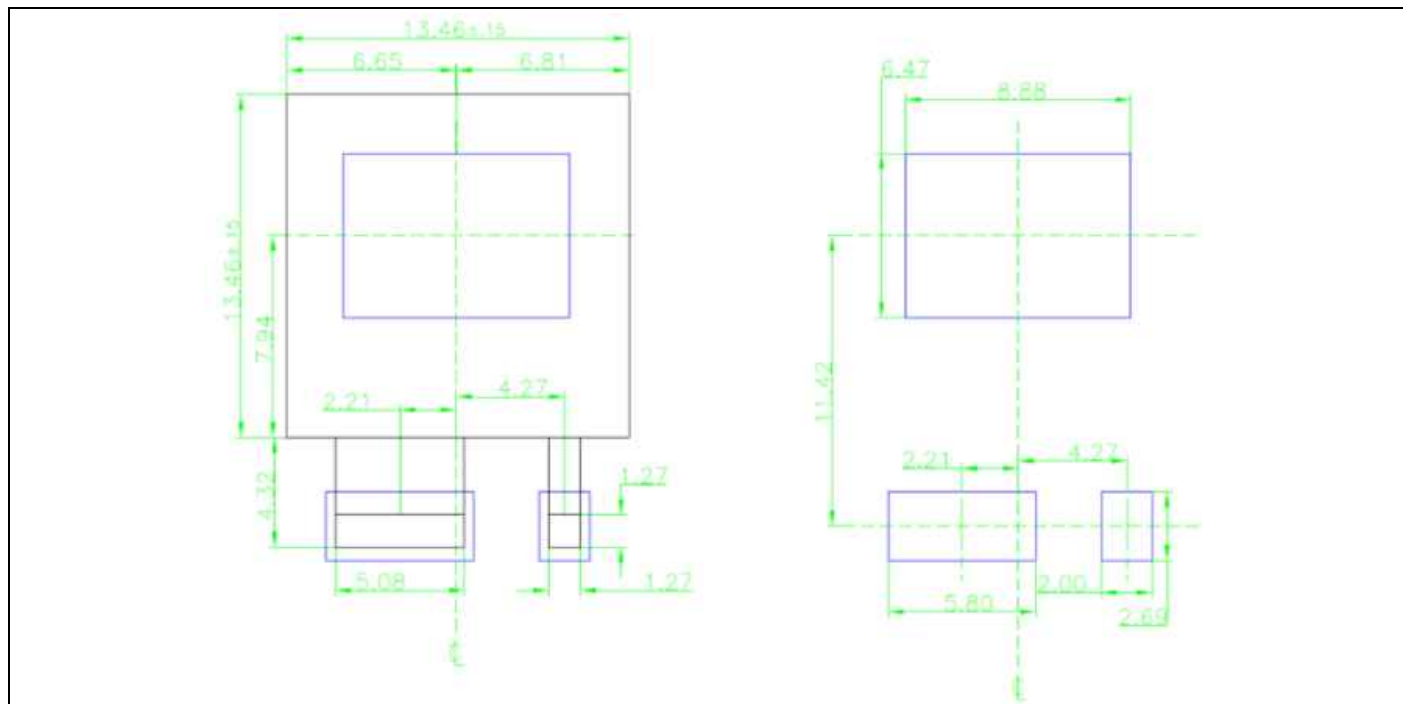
SupIR-SMD nominal, suggested solder pads (dimensions in mm)
